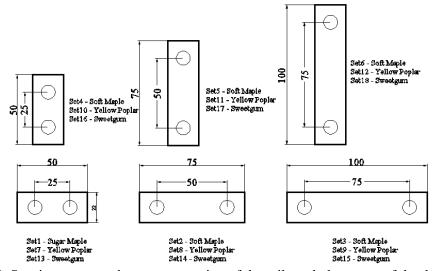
Specimen set numbers, cross section of the rails and placement of the dowels when dowels were located 13 mm constant (dimensions mm)
